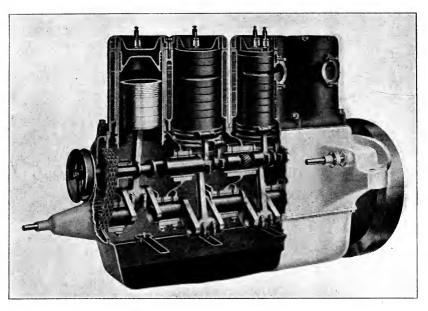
Columbia Knight Motor, Showing Sleeve-Valve Arrangement.
